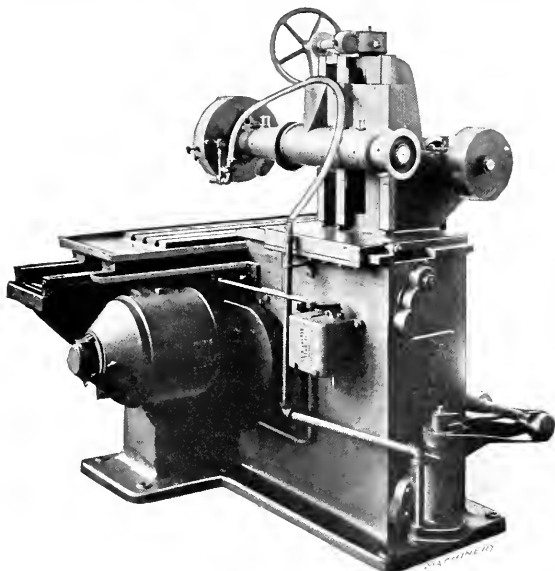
Diamond Motor-driven Surface Grinding Machine
